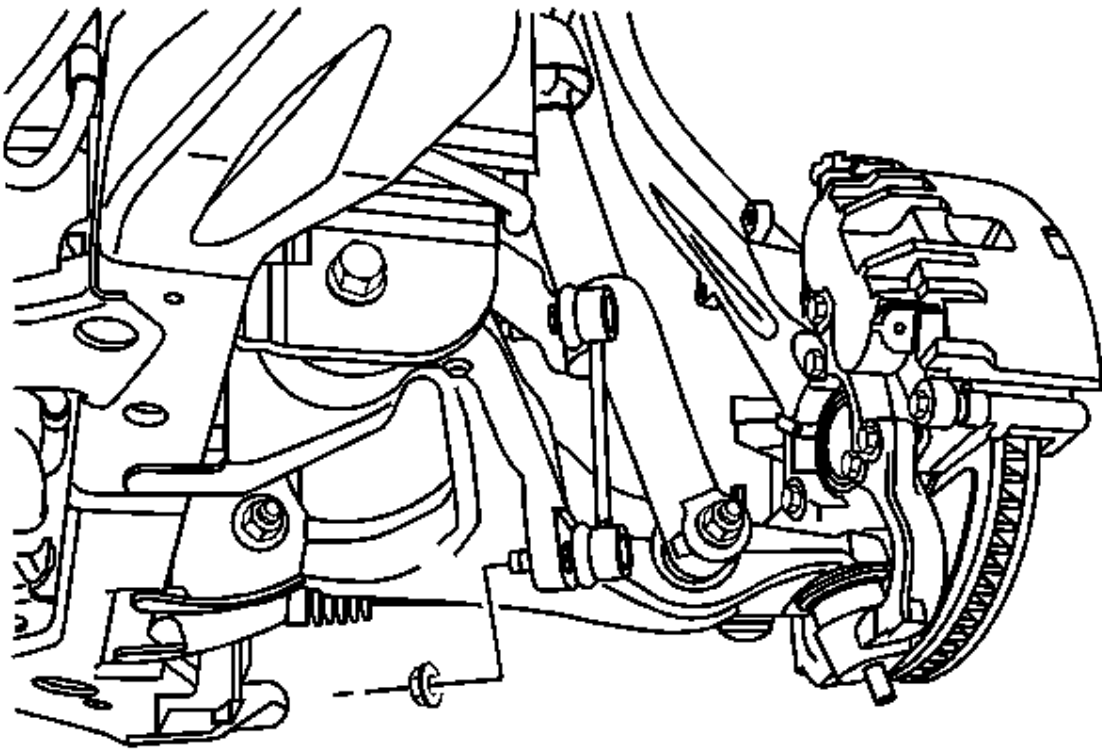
View Of Stabilizer Shaft Link Lower Retaining Nut
